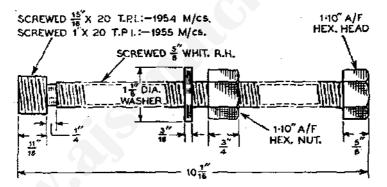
DIMENSIONS OF DRAW BOLT FOR FORK DISMANTLING.
